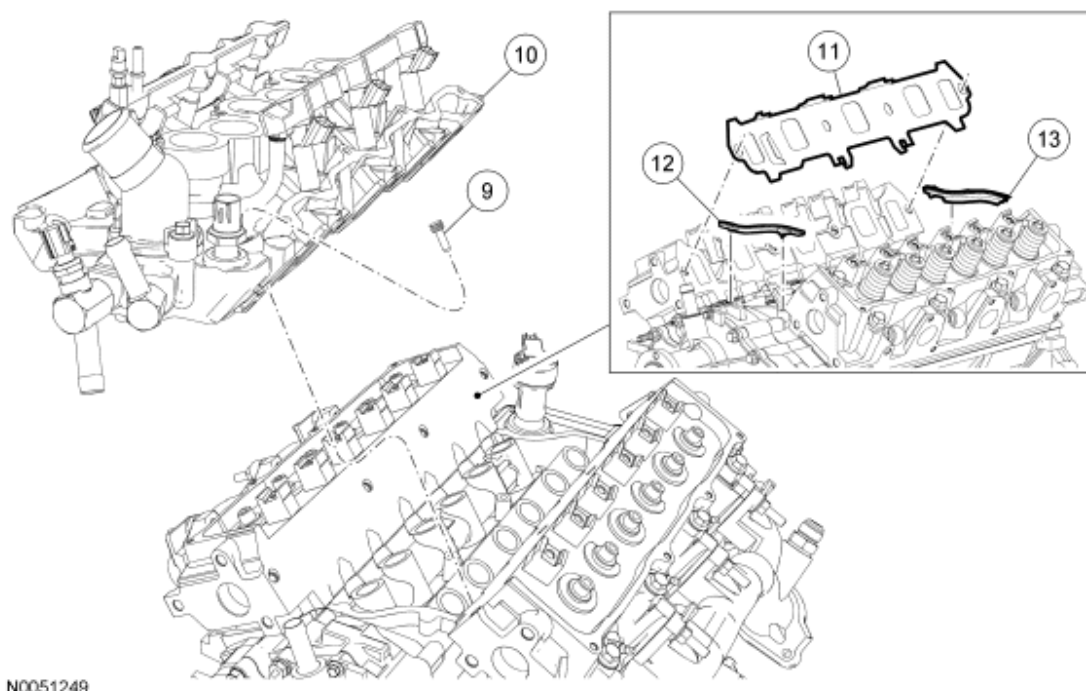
View Of Lower Intake Manifold Components (3 Of 3)
